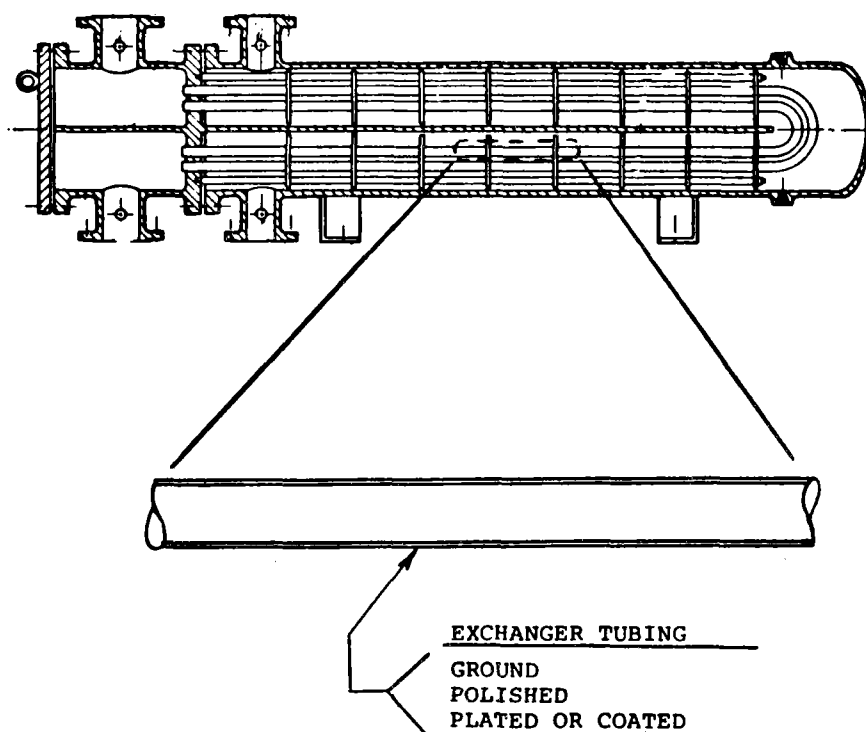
Shell and Tube Exchanger with Deposit-Resistant Tubes
